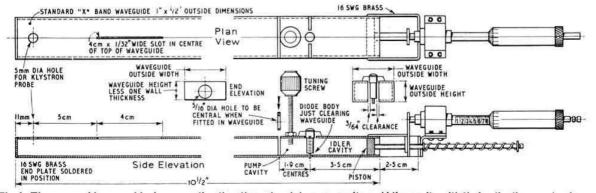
The waveguide assembly, incorporating the attenuator slot, pump cavity and idler cavity with their adjusting mechanisms. The waveguide is standard WG16 (RG-52/U), with internal dimensions of 0.9 in. \times 0.4 in., and external measurements of 1 in. \times 0.5 in. This size is often stocked by wholesale non-ferrous metal merchants.
